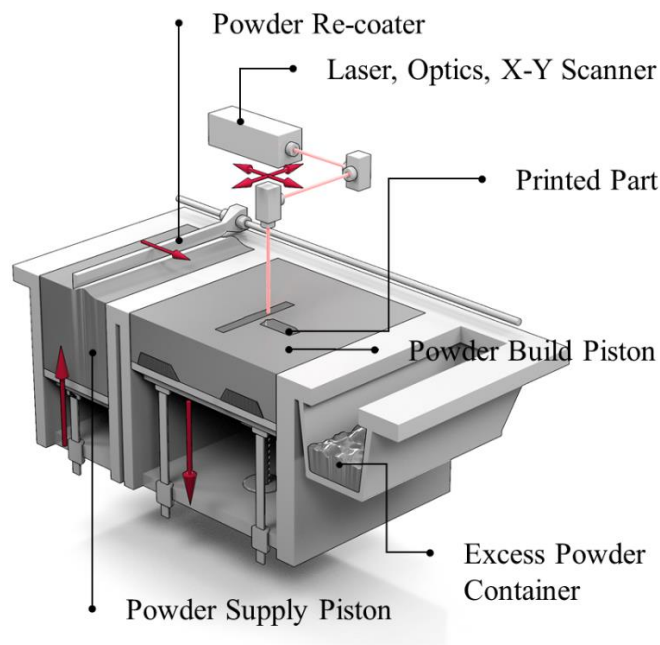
Schematic of typical selective layer sintering 3D printer assembly.
